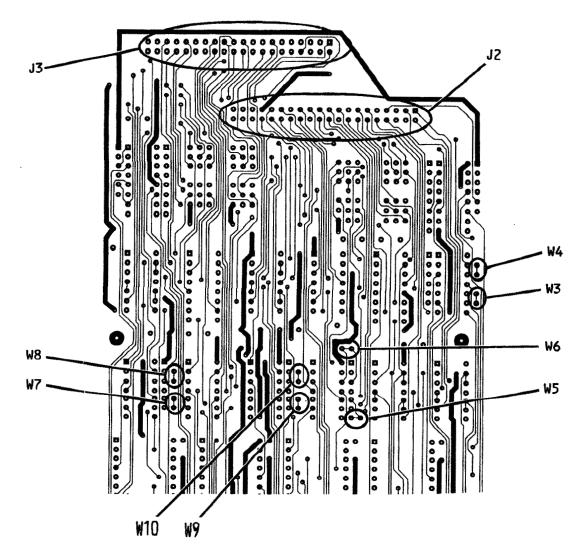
'W' Pads. (AM-337 Printed Circuit Board - Solder Side)
